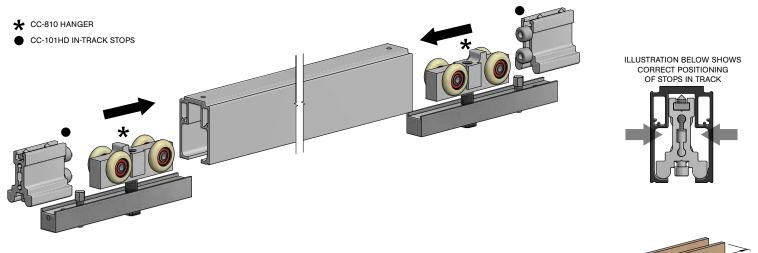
COMPLETE DISASSEMBLED HANGER ASSEMBLY (2X REQUIRED)
